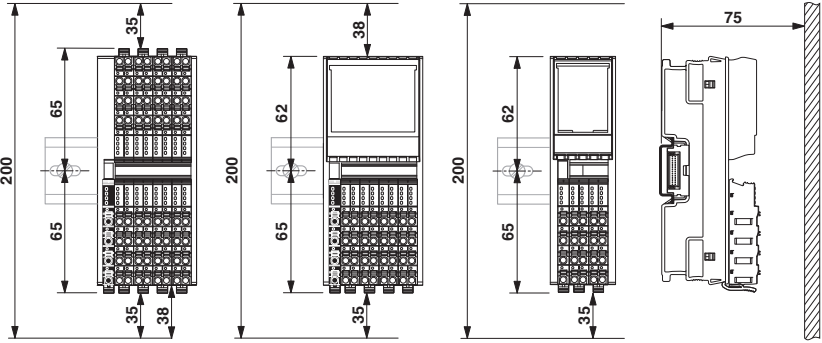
Mounting distances: I/O modules (dimensions rounded):
